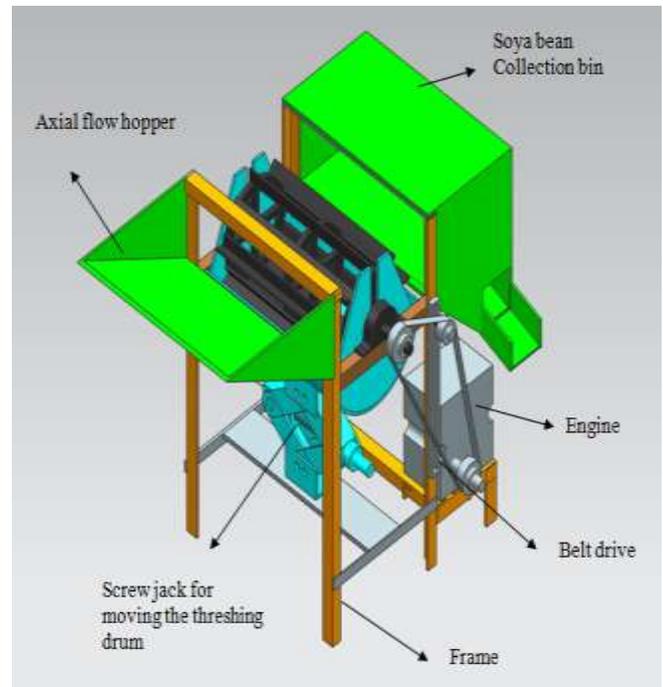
Axial flow, through in type, angle bar Soybean threshing machine
